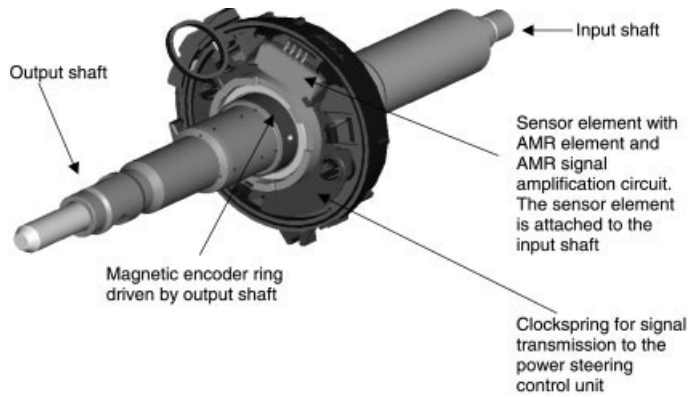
Steering torque sensor using a magnetic encoder ring and an anisotropic magneto-resistive element
